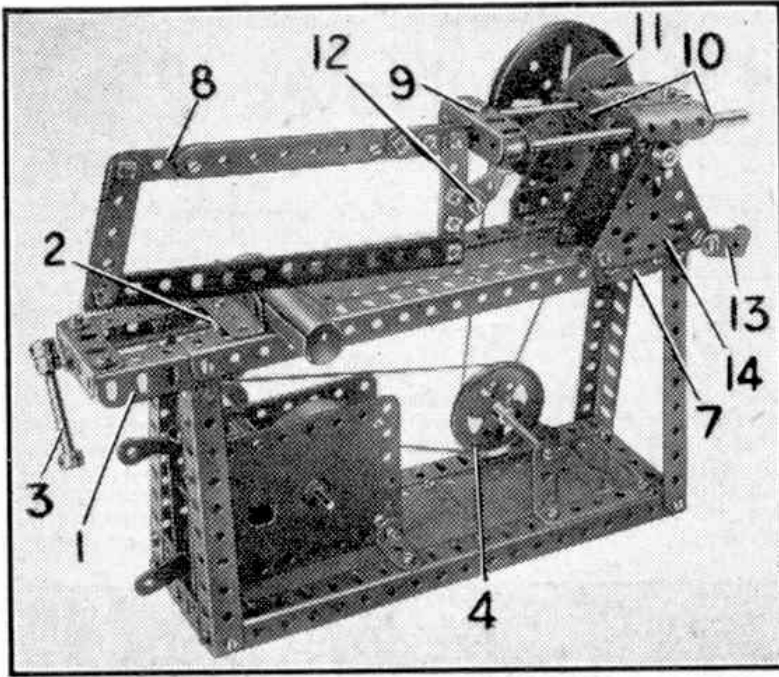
A mechanical metal sawing machine driven by a No. 1 Clockwork Motor.
